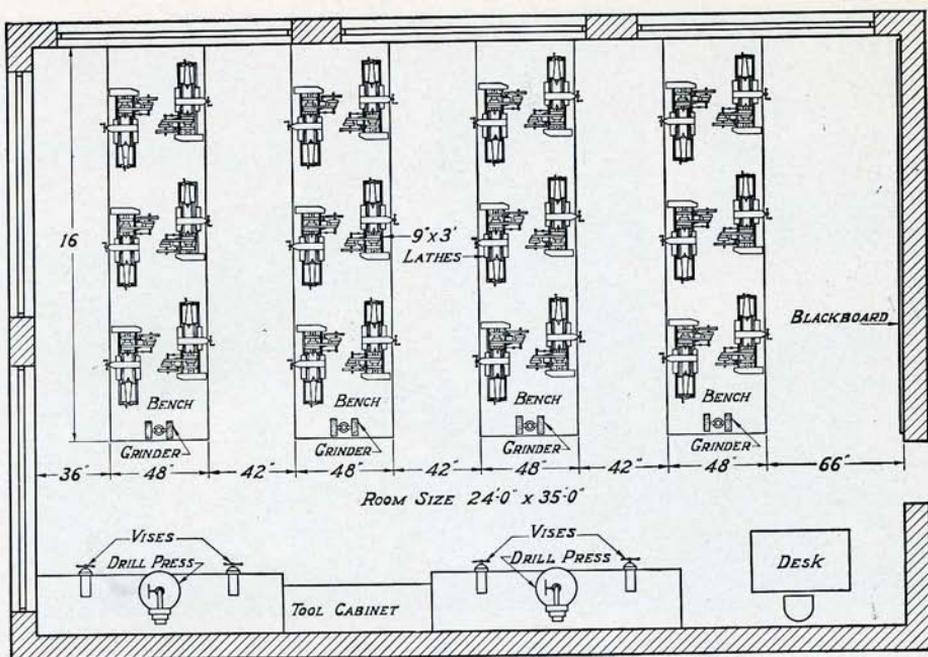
Floor Plan of School Shop 24'x35' with Twenty-four Motor Driven Bench Lathes
